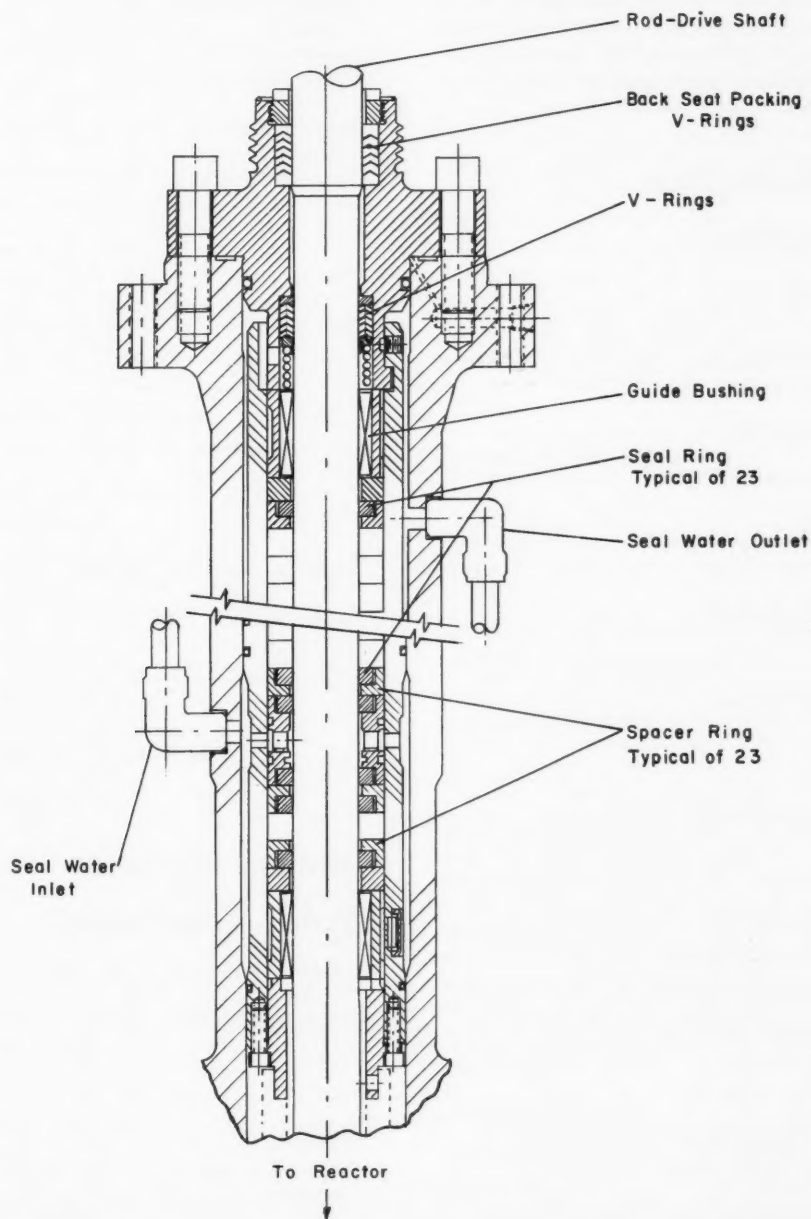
Buffer seal assembly for penetrations through the N.S. *Savannah* reactor-vessel head.
